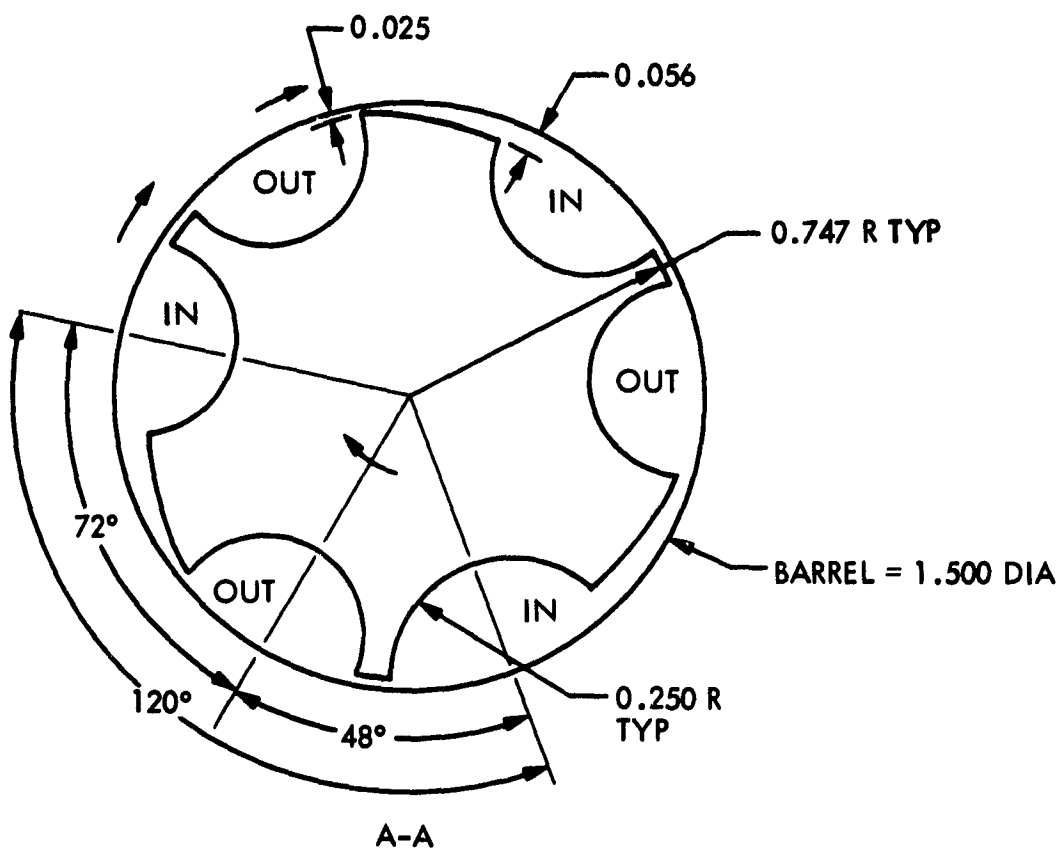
A Cross-Section View of the Mixer Section Which is Designed Following the Concepts Discussed by Maddock (Reference 5-3)
